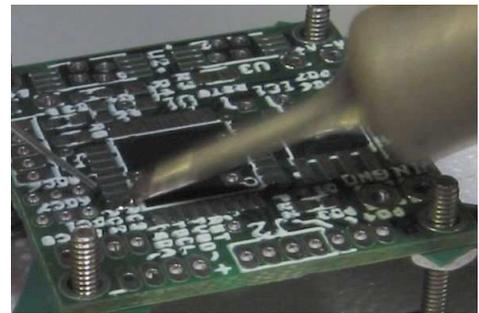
To solder an IC, start by applying a little solder to the 1st pad.
